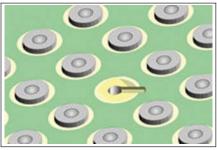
Channel or canal recessed into board to permit circuit routing to be level with board surface.
